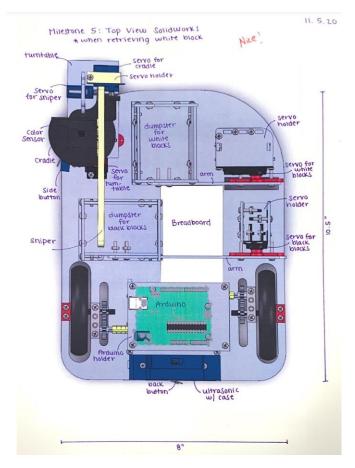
SolidWorks screenshot of Top View of robot for Milestone 5. This figure shows dimensions and labels to all components.
